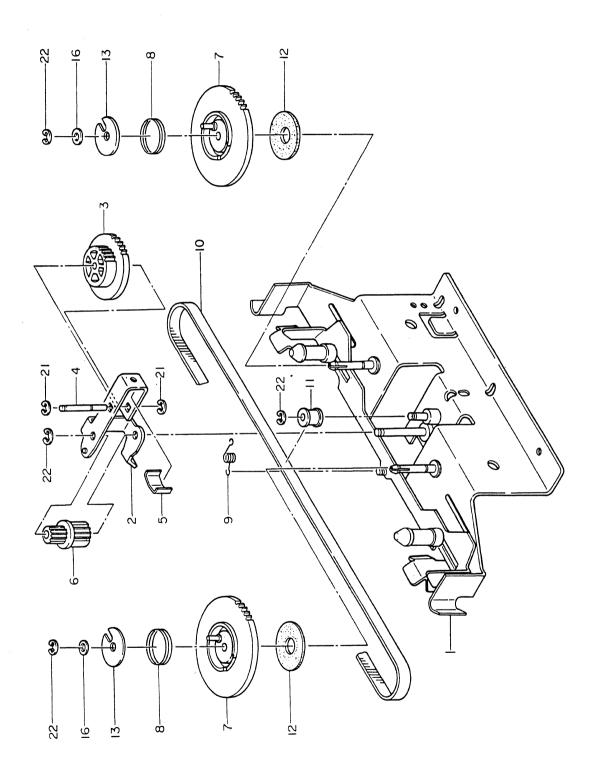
Ribbon Feed Mechanism (3LR-193456-4)
